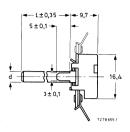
Single potentiometer with mounting bushing. For dimensions d and L, see Spindles.
